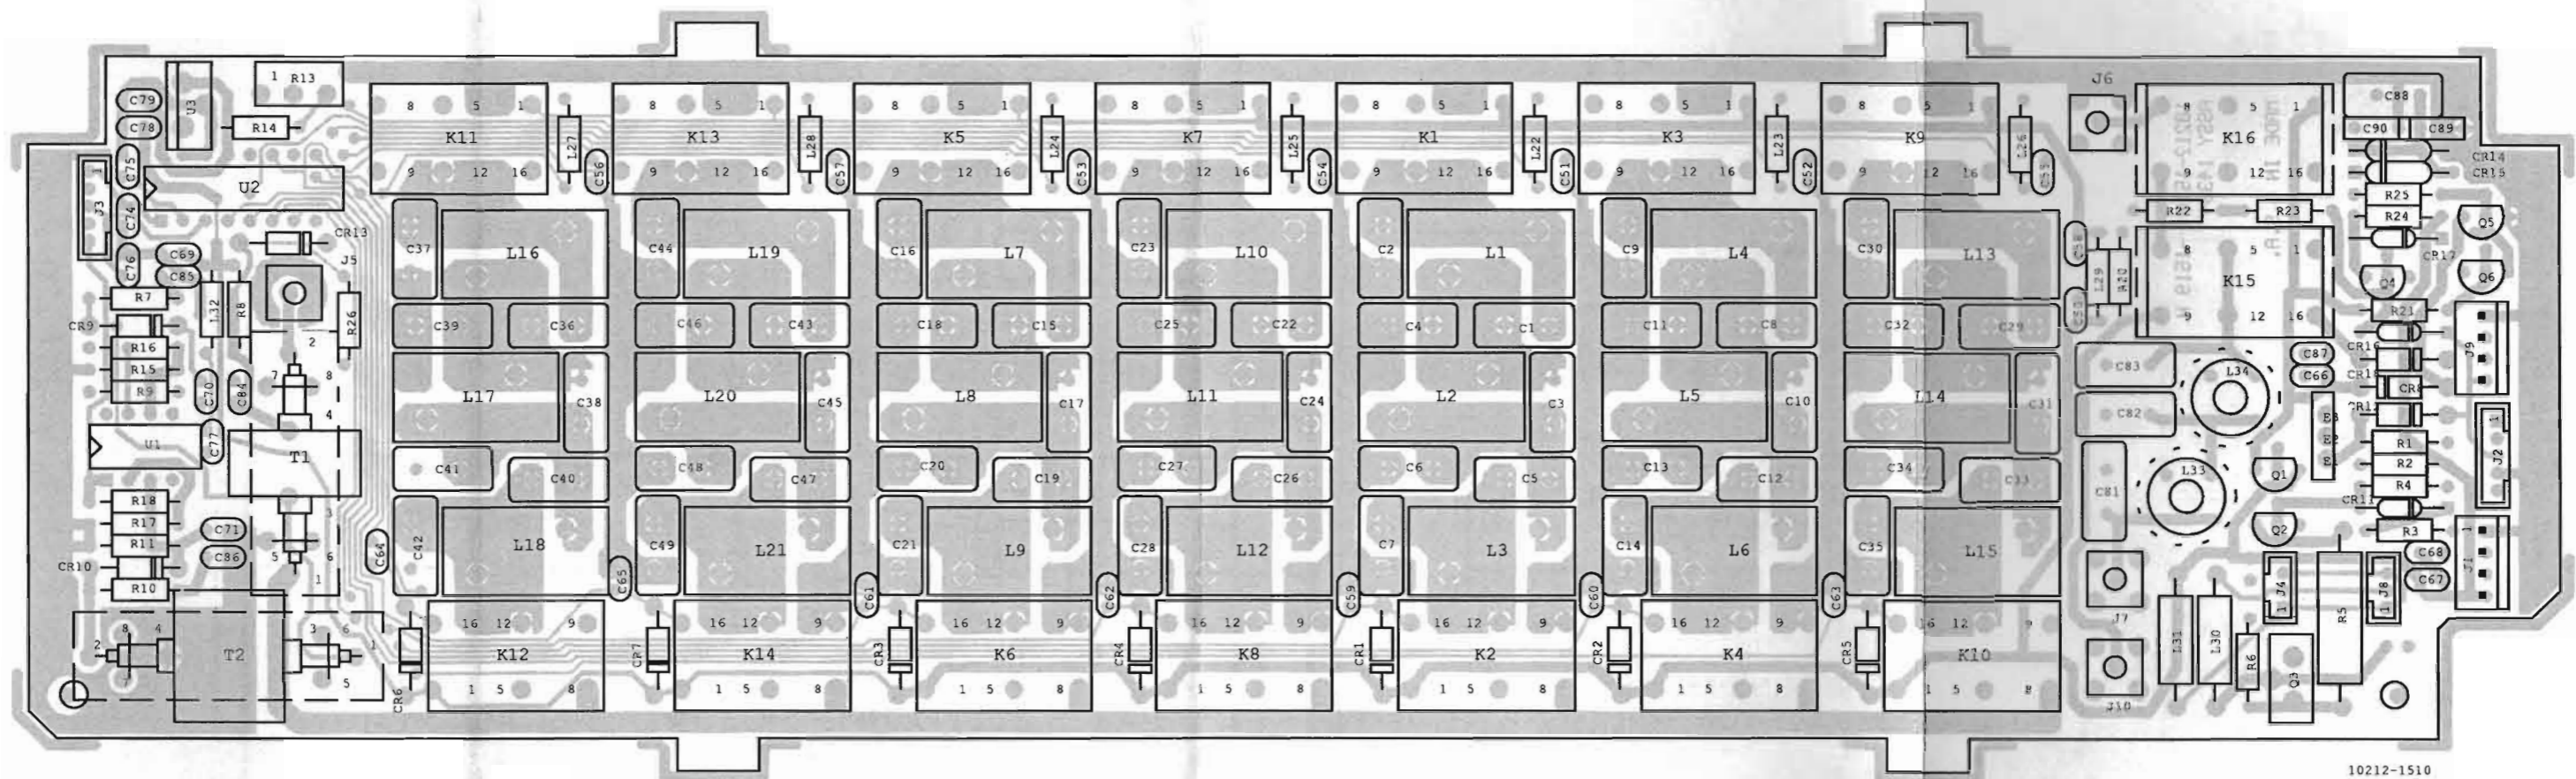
A4 Harmonic Filter PWB Assembly Component Location Diagram (10212-1510 Rev. G)
